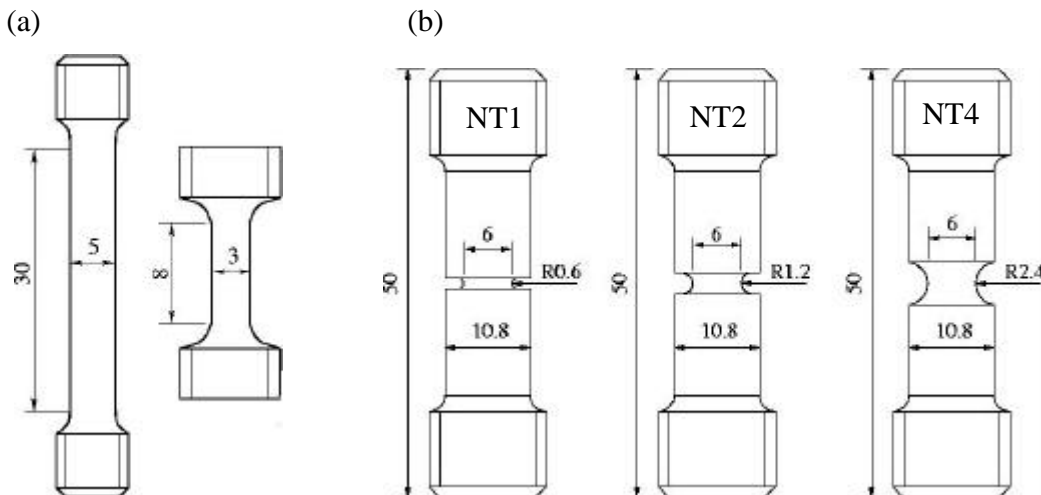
Tensile specimens for mechanical tests, (a) smooth tensile (b) axisymmetrically notched. Dimensions are in mm.
